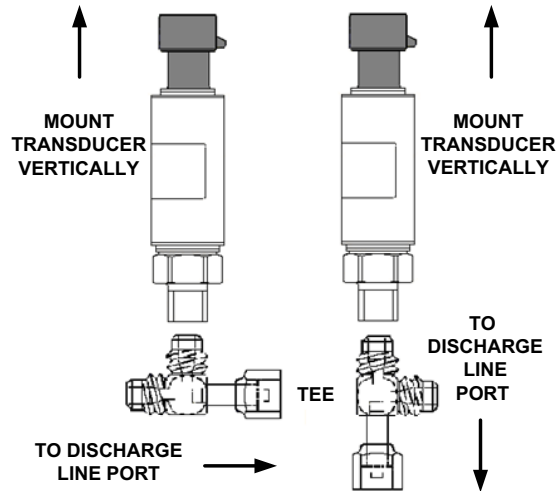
PRESSURE TRANSDUCER MOUNTING
